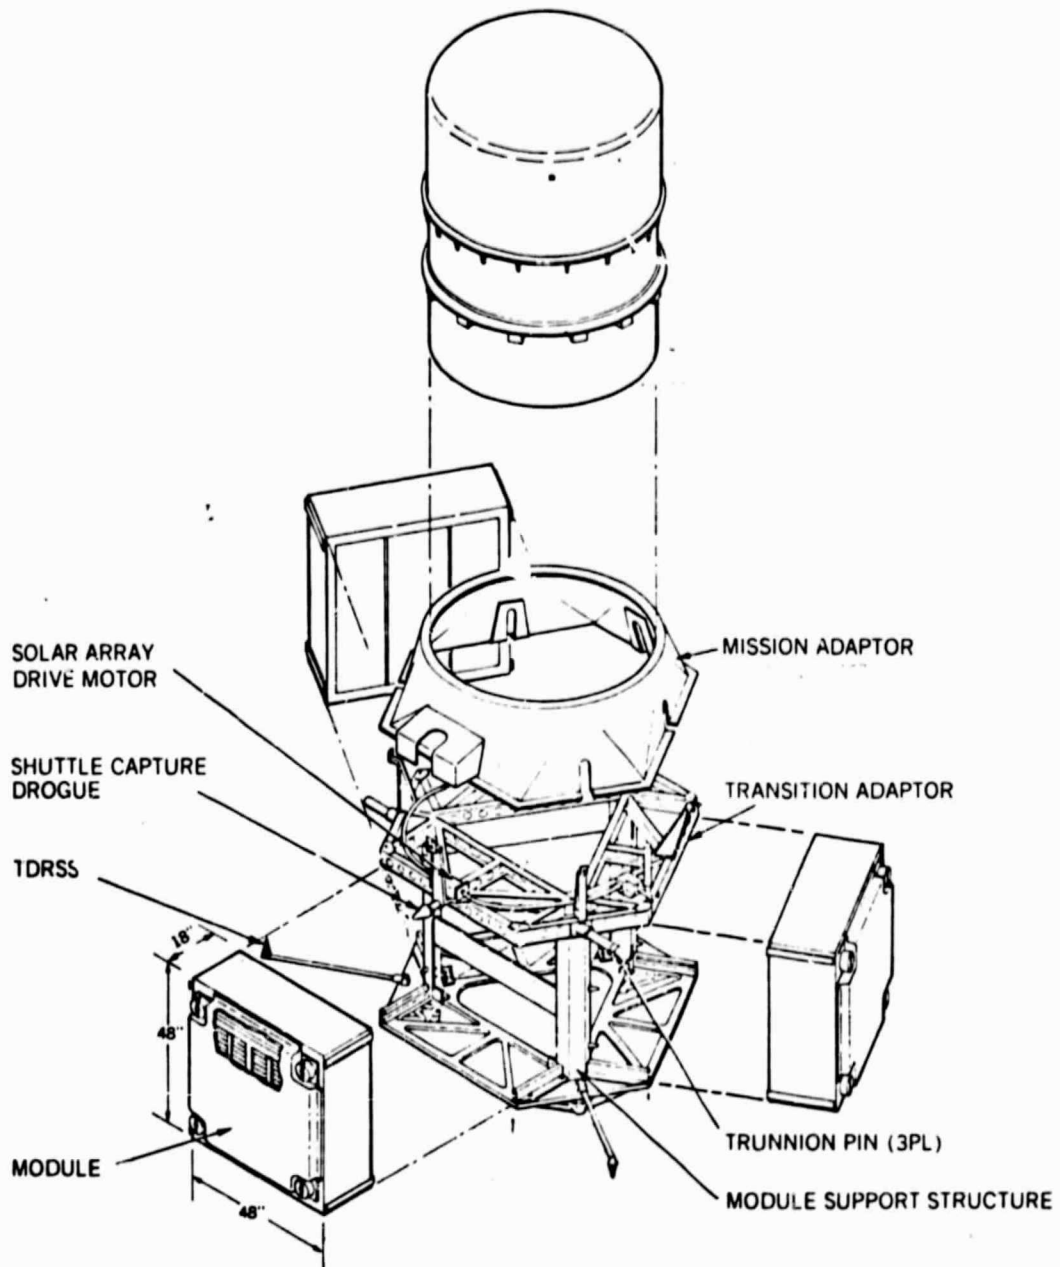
EGRET SPACECRAFT - EXPLODED VIEW
